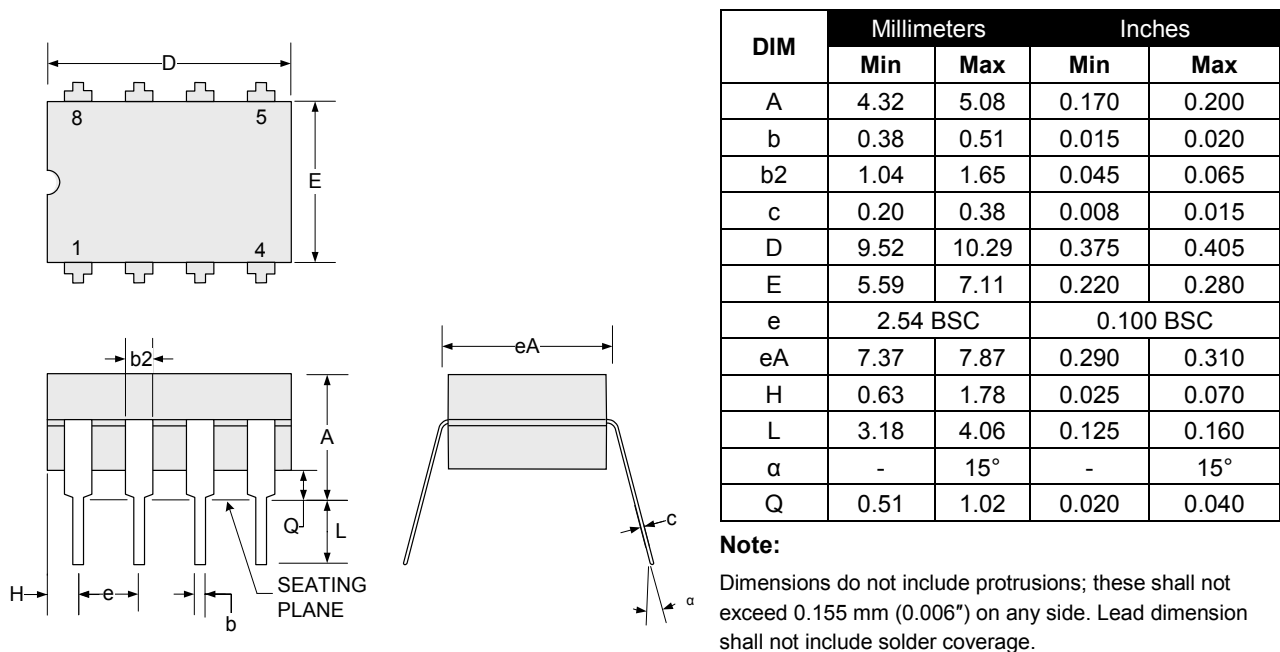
· Y 8-Pin Cerdip Package Dimensions
